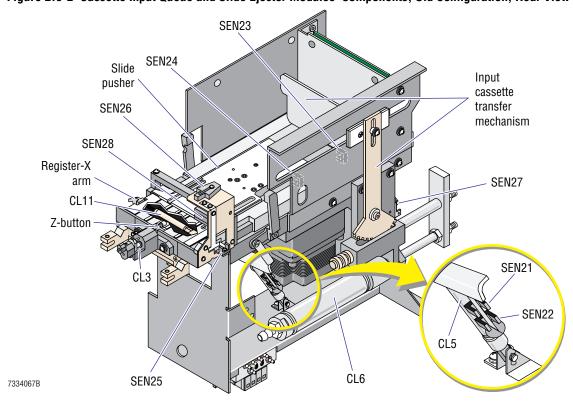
Cassette Input Queue and Slide Ejector Modules' Components, Old Configuration, Front View
